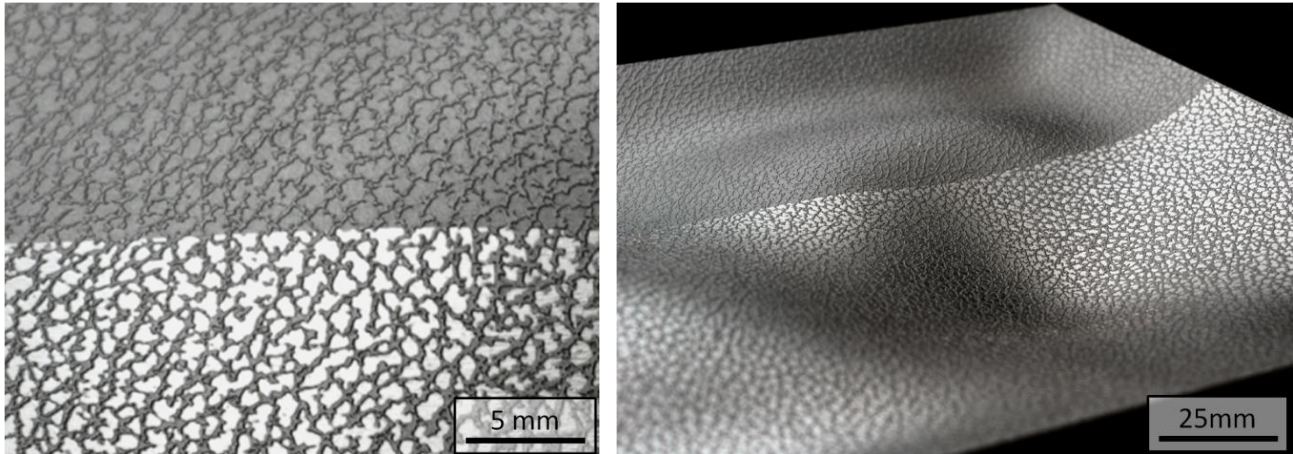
Photograph of a (a) cut-out from a selective laser polished leather-textured free-form surface and (b) selective laser polished leather-textured free-form surface made of tool steel 1.2343 [8].
